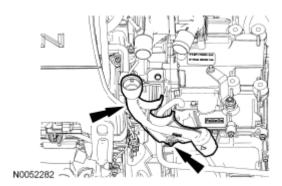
Removing/Installing Bolt & Ground Wire From Engine Front Cover Courtesy of FORD MOTOR CO.
